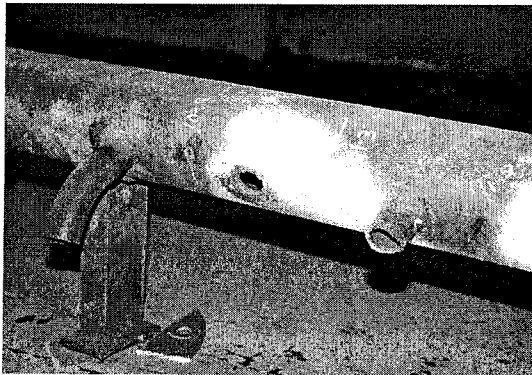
Heat Recovery Boiler Eco. Feed inlet header Cracks
